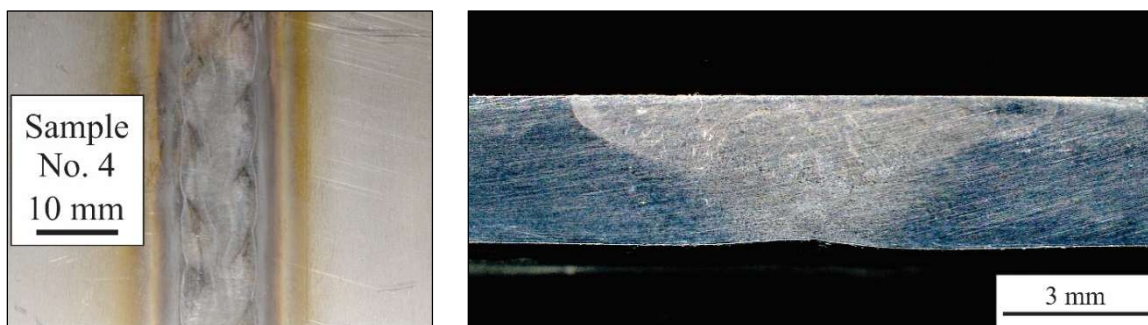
Specimen N° 4 - TAG, 180 A, no filler material
